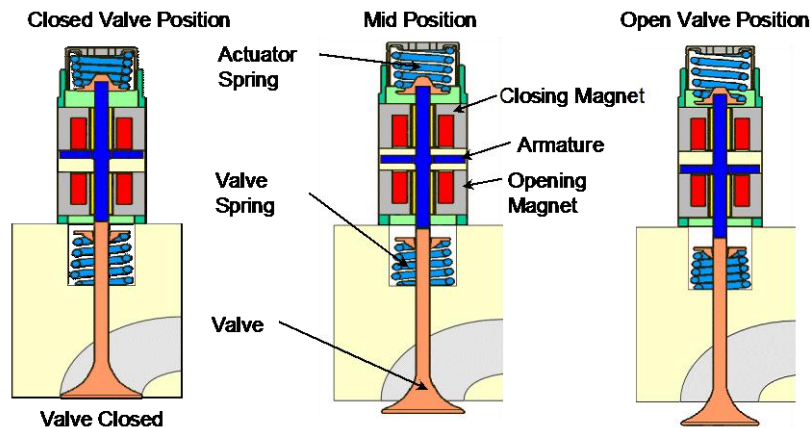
Valve position by the action of magnetic and spring forces [FEV]
